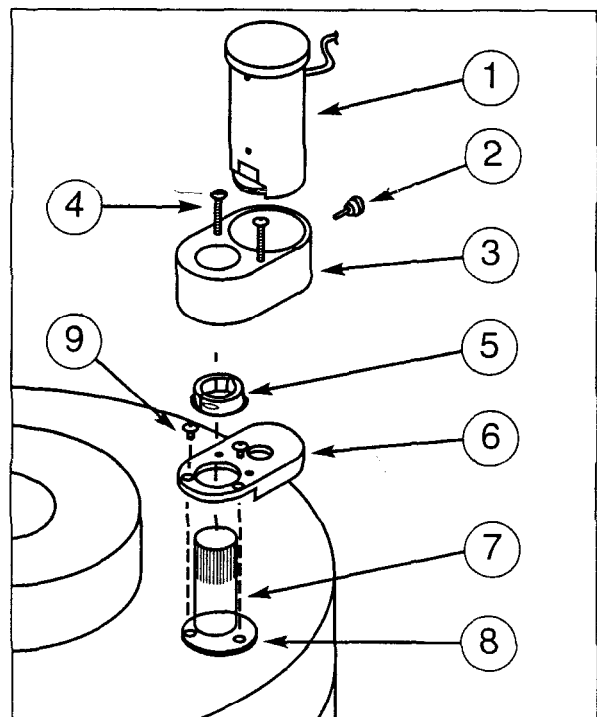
Electric Focuser Parts. (1) Motor Assembly; (2) Locking Thumbscrew; (3) Gear Cover; (4) Gear Cover Screws; (5) Split-Ring Gear; (6) Focuser Mounting Plate; (7) Focuser Knob; (8) Focuser Flange; (9) Mounting Screws.
